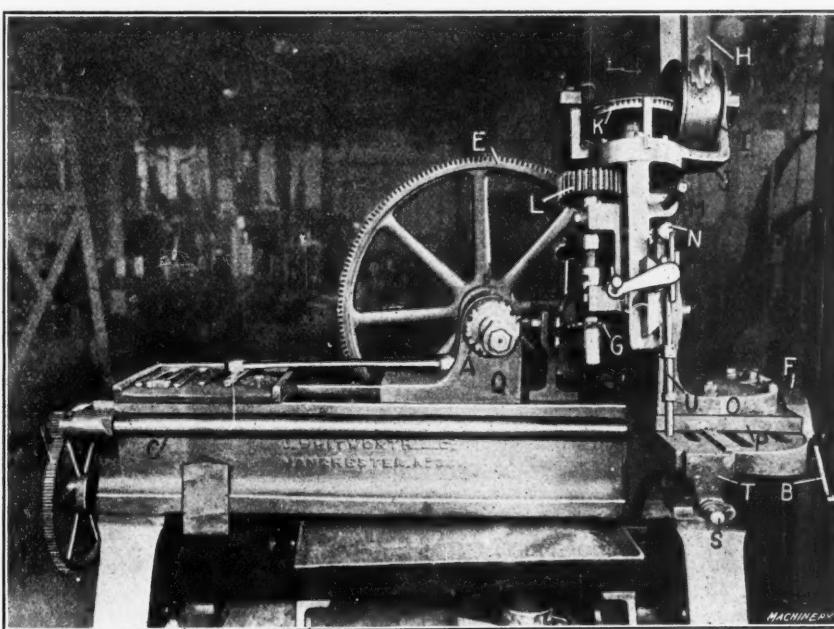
Gear-cutting Machine built by J. W. Whitworth & Co., Manchester, England
